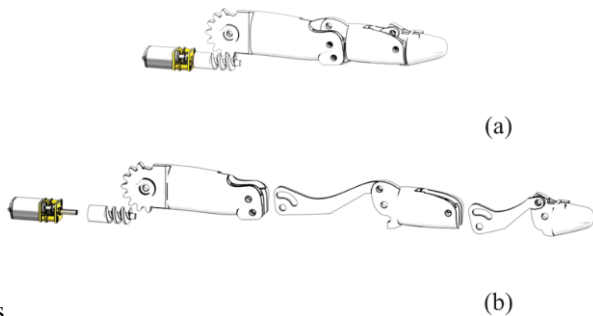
Printed finger in 3D. (a) Assembled finger view. (b) Exploited finger view.
